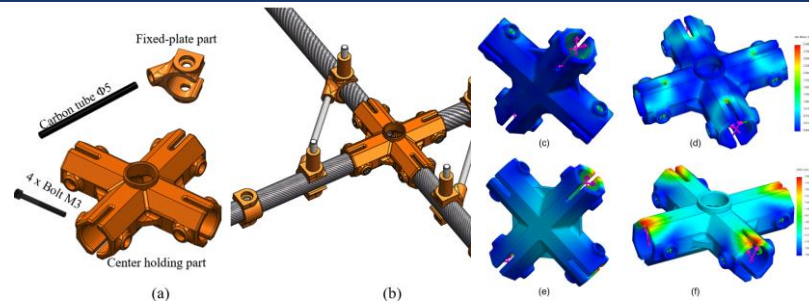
Center holding connecting joint p (a), assembly center holding joint (b), stress analysis: bottom view (c), side view (d) and displacement analysis: bottom view (e), side view (f)
